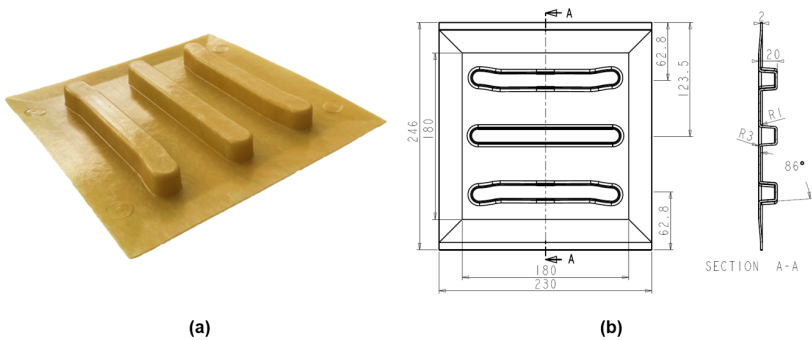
(a) Demonstrator part DFG GRK 2078/2 (b) technical drawing
